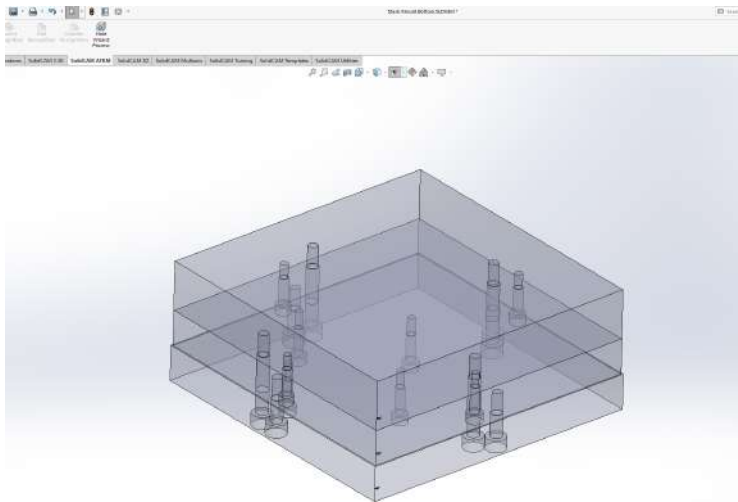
, A11. SolidWorks Display for Drilling Holes and welded mistake
